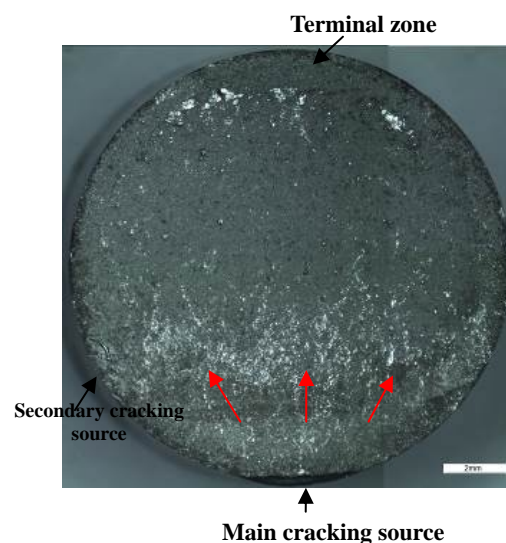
Low optical magnification fracture image of broken shaft fracture after cleaning.
